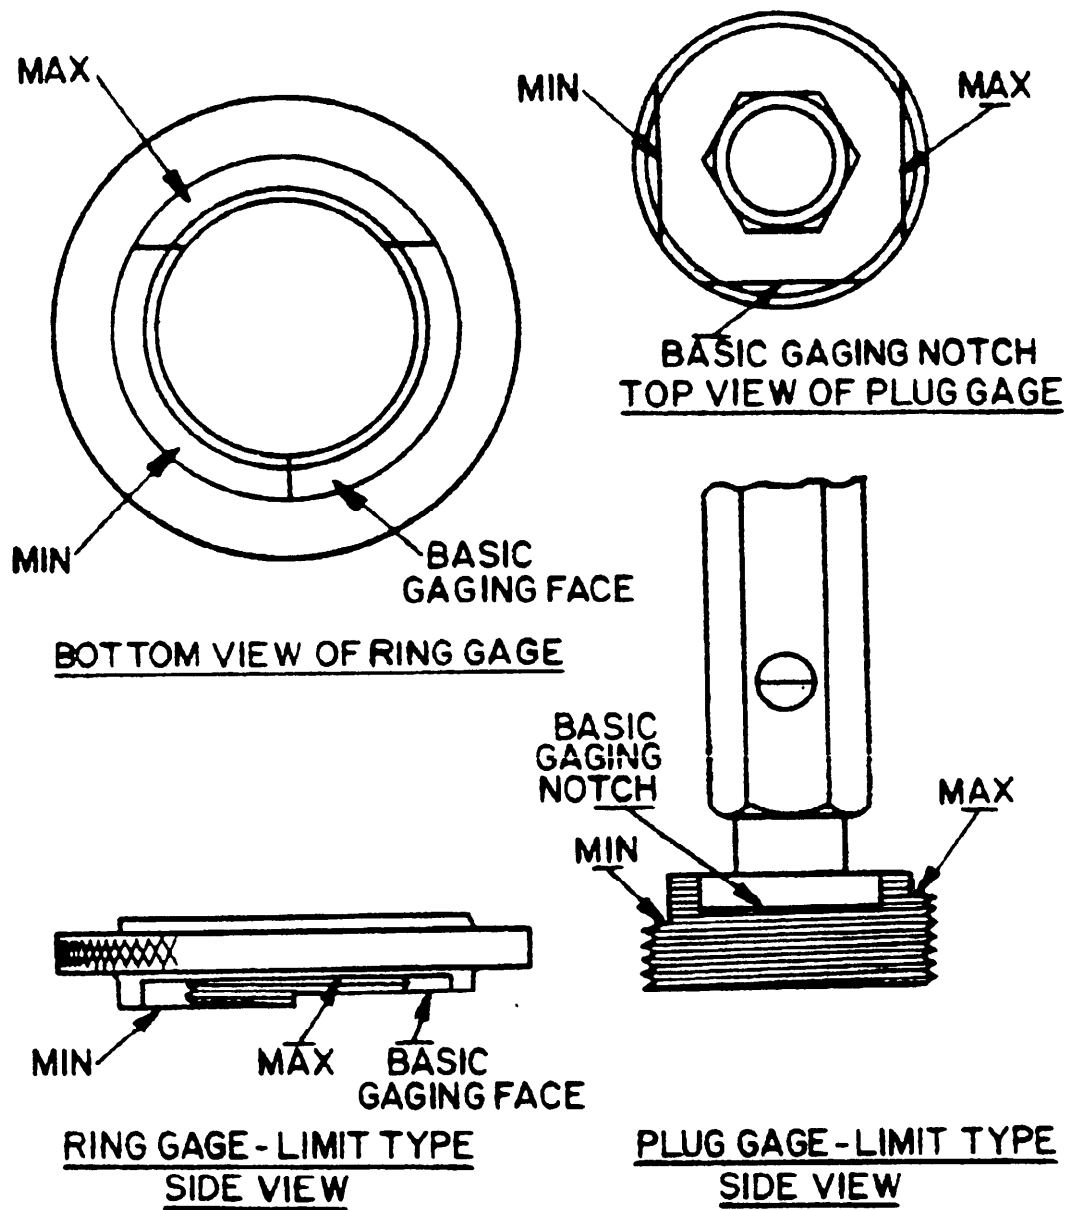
Alternative form of taper pipe thread limit plug and thread ring gages.
